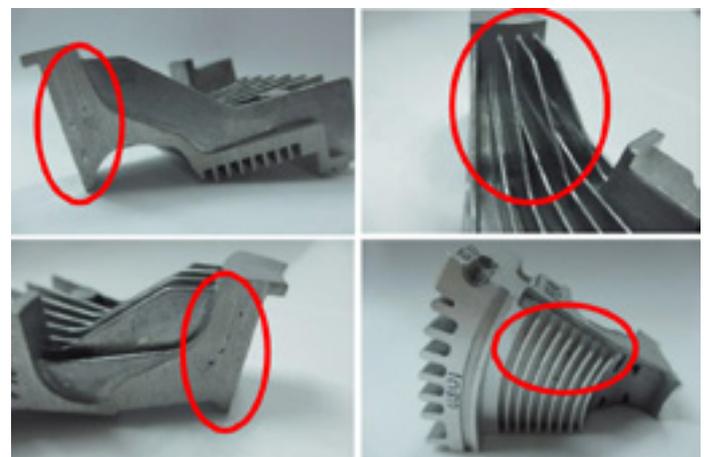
Traditional design showing the pinhole and air porosity defects in the casting
